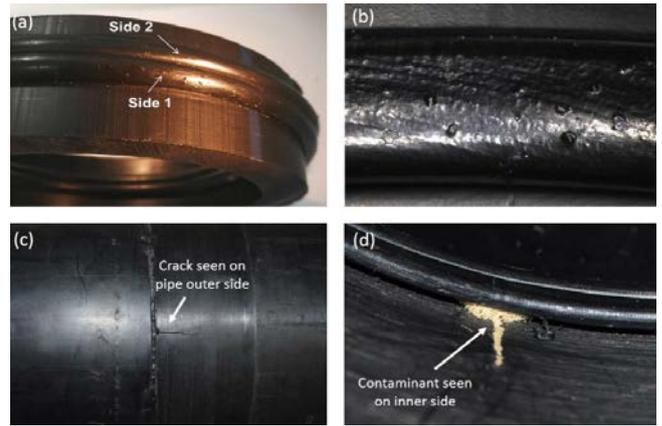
(a) and (b) shows photographs at two different magnifications for a very rough weld bead, caused by material inhomogeneity. (c) shows photograph of a cracked weld region as seen on the outer side of pipe. (d) shows part of a foreign contaminant in the crack and sandwiched into the weld bead, as seen on in the inner side of pipe. [Note: For illustrative purposes only]
